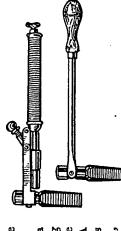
Hatchet soldering irons. That above is a self-heating benzoline iron.
